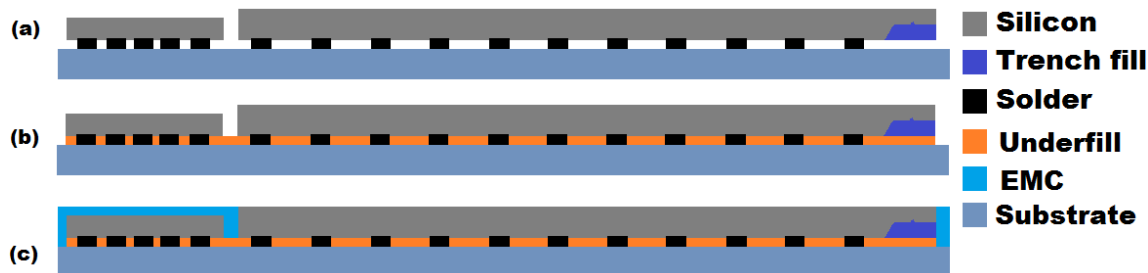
Schematics of a package assembly where smaller details such as the passivation layers and RDL are not shown. a) Surface-mount of sensor die and companion chip on substrate and reflow b) Underfill dispensing and cure c) Film assisted molding.
